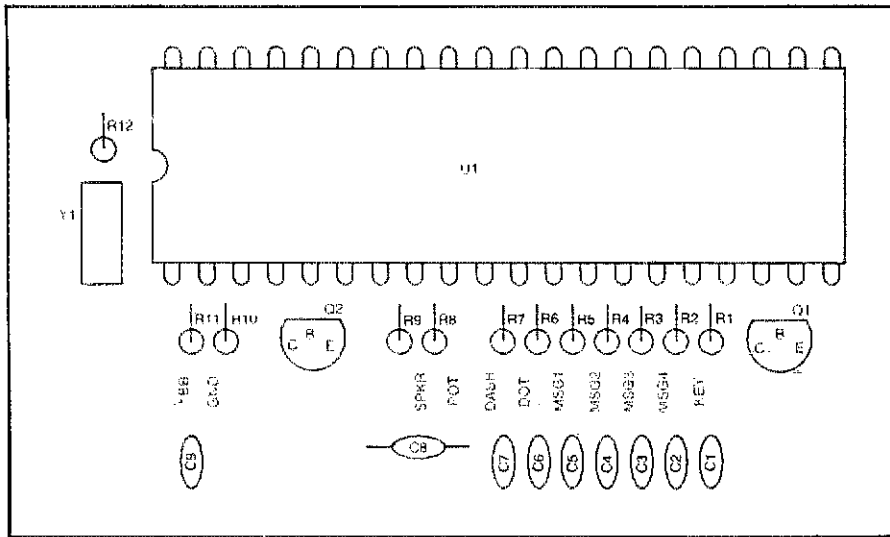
Part-placement guide for the CMOS Super Keyer II. Parts are placed on the nonfoil side of the board; the shaded area represents an X-ray view of the copper pattern.
